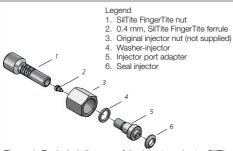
Exploded diagram of the injector adapter SilTite FingerTite assembly.
